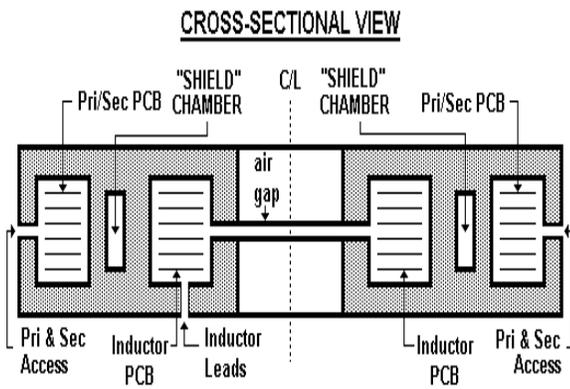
Cross-sectional view of the PIM system in Fig. 8.
